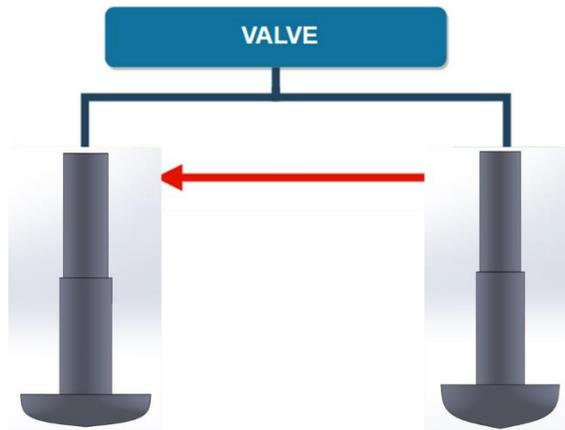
Design 2 replaces Design 1 in the Valve assembly
